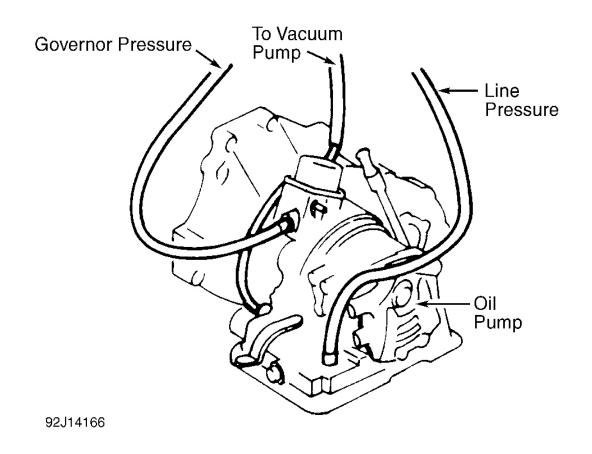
Identifying Hydraulic Pressure Test Ports Courtesy of FORD MOTOR CO.
